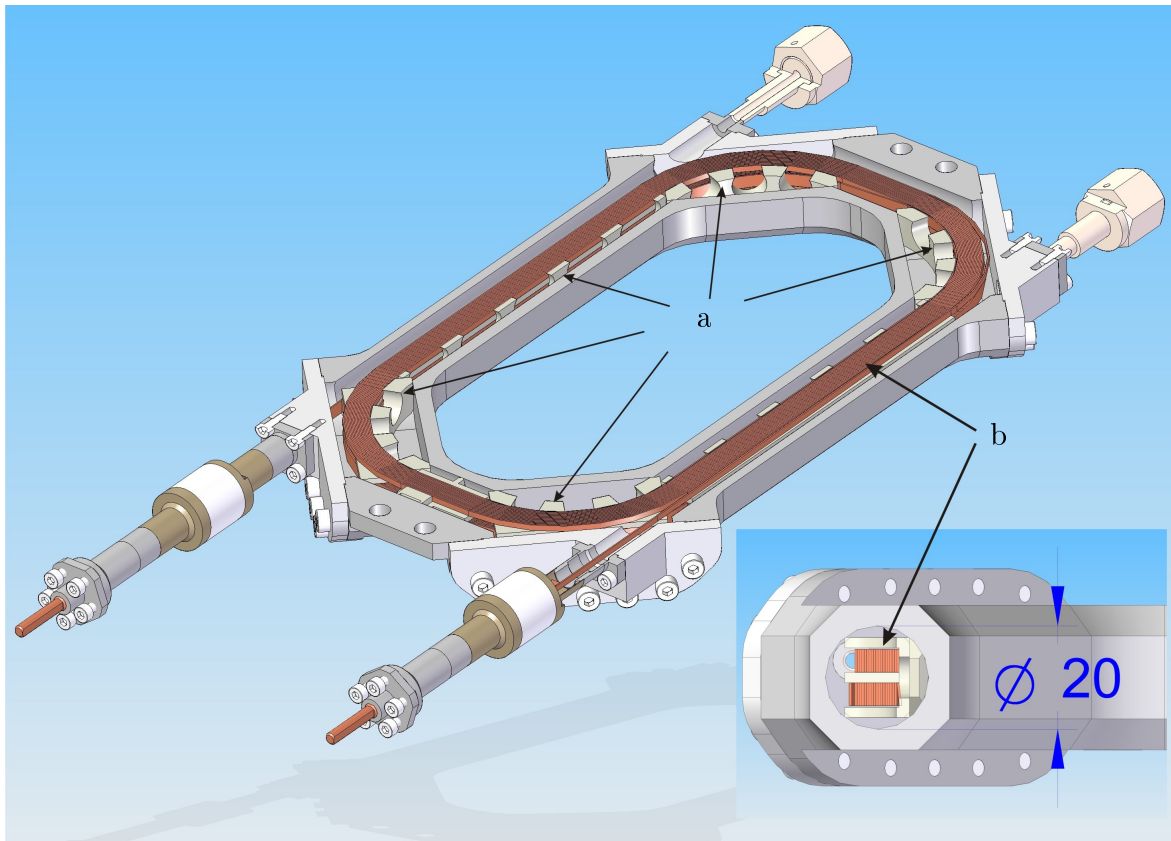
Test HTS coil section view, a - guiding PTFE profiles, b - HTS winding.
